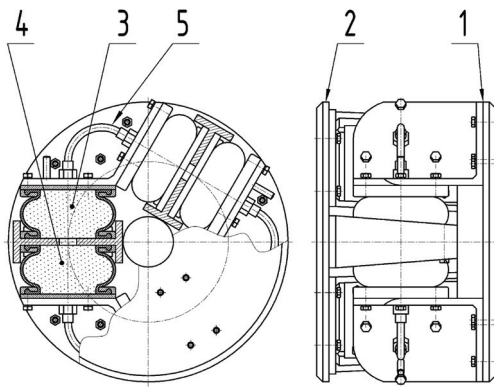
Real assembly of the pneumatic flexible differential shaft coupling.
